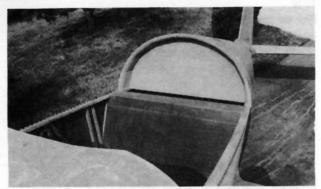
Canopy removed. Aft bulkhead before cutting out tail access.
